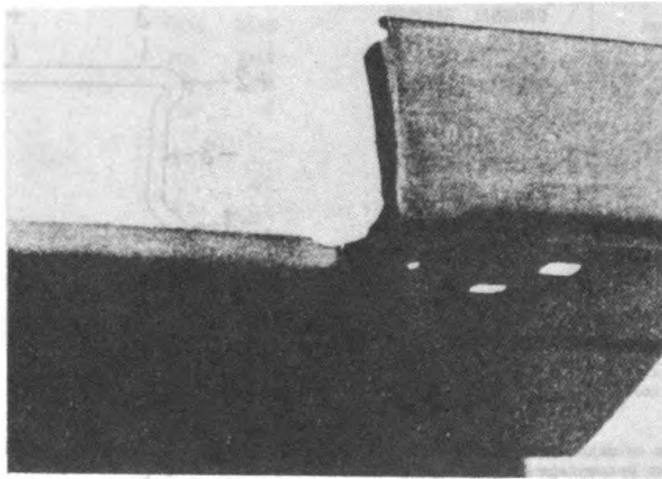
Edge splitting in license opening flange with G. M. 6187-M steel
